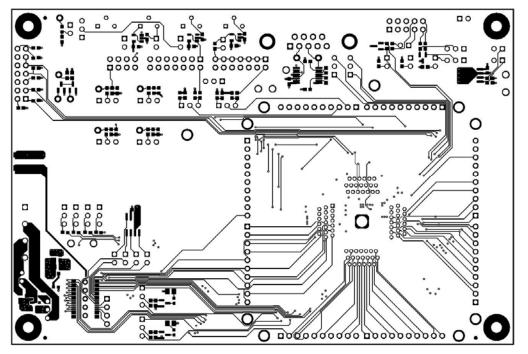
UCD3138A64OEVM-662 Top Copper (Top View)
